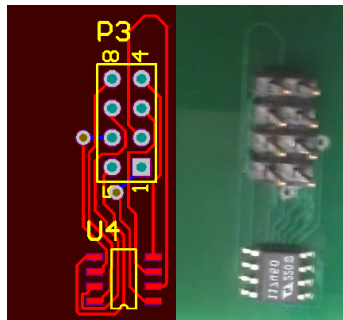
PCB schematic of a LTC1174CS8-5 test board and mounted version
